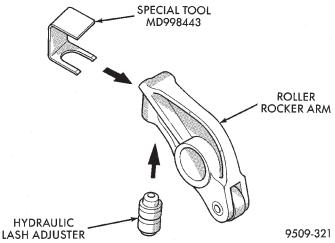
Rocker Arm/Hydraulic Lash Adjuster
